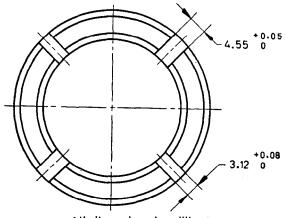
DIMENSIONS FOR SPOKE WRENCH, TYPE A
